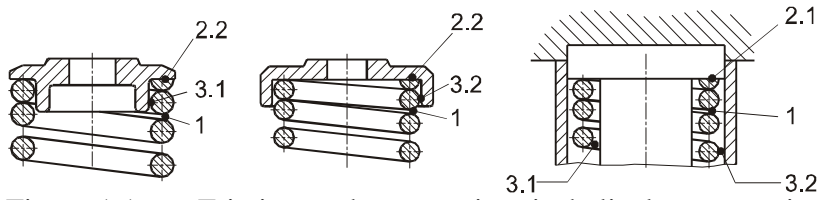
Friction and wear points in helical compression springs between: 1 the coils; 2.1 the coil end and the housing; 2.2 the coil end and the spring seat; 3.1 the coil and the hook, eye or loop (where present) or the spring seat; 3.2 the coil and the sleeve or centering pin
